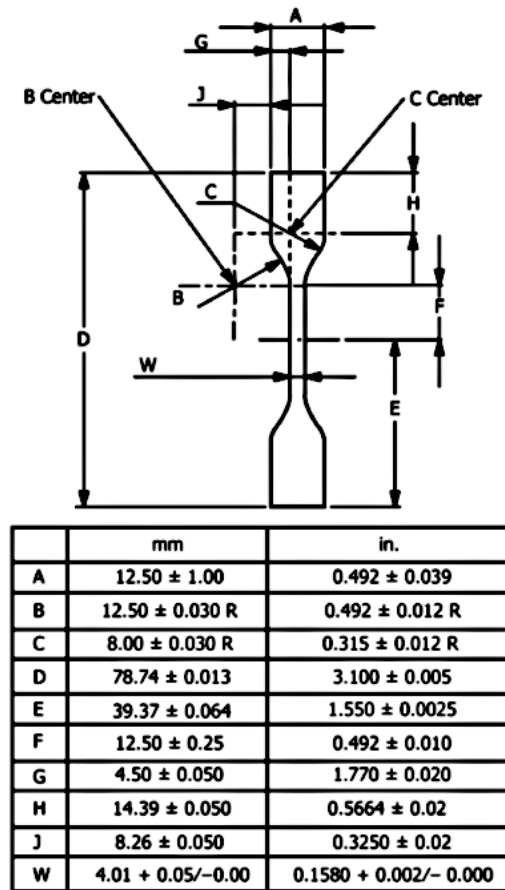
Smooth specimen sizes specified in ASTM D44882.
